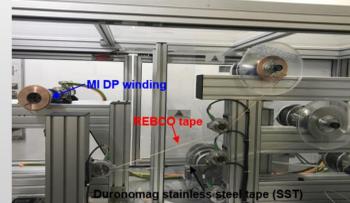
MI double-pancake (DP) coil wound by LNCMI homemade HTS winding machine
